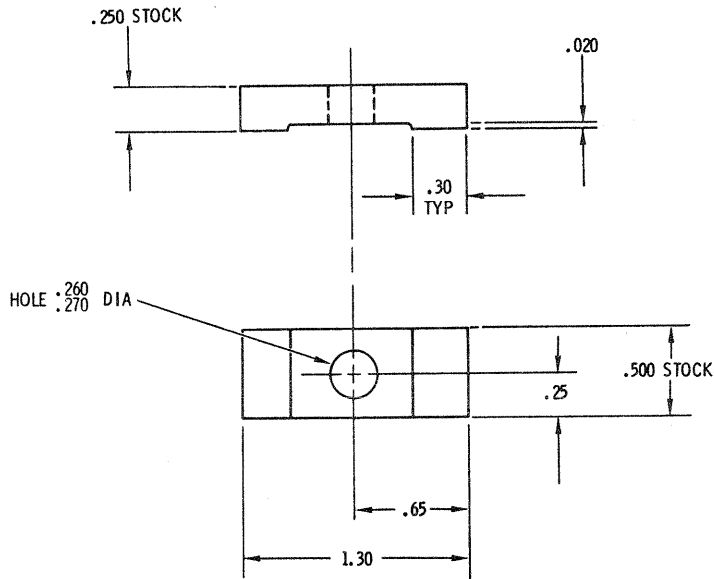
Pitch Bearing Case Damper Attach Hole Inspection and Spacer PN 269A1207 Installation
